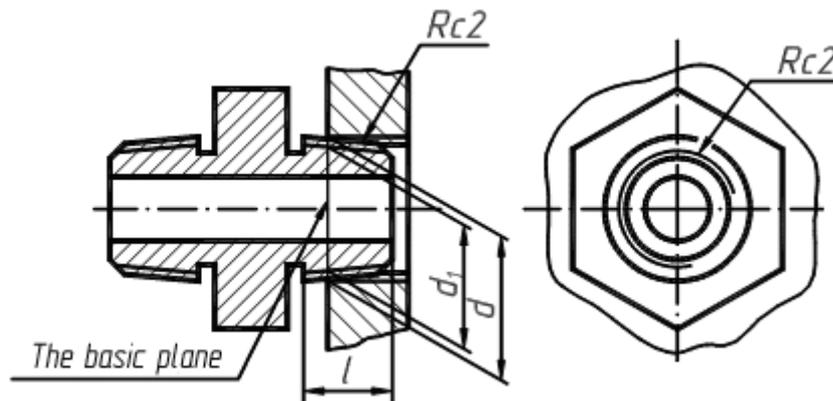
The conventional drawing of a pipe cylinder thread
